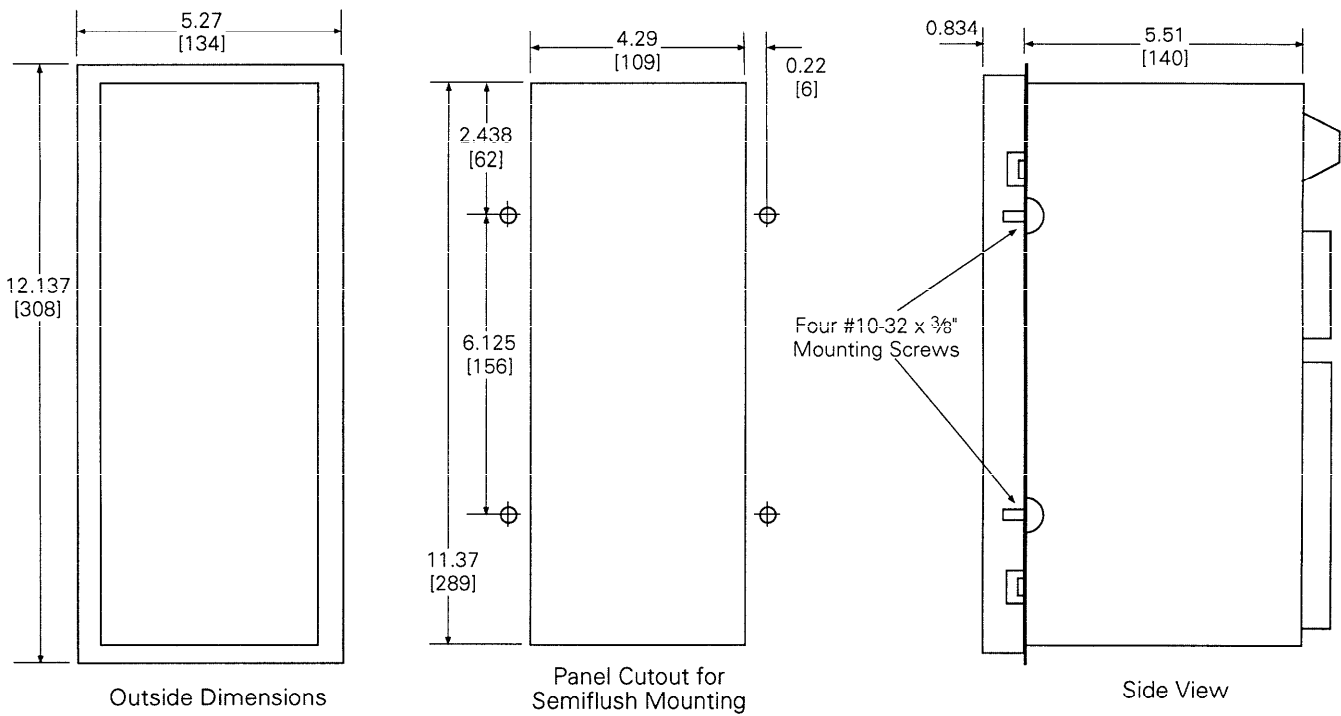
Case and mounting dimensions in inches [mm] for the DMP in a fixed vertical or horizontal case.
